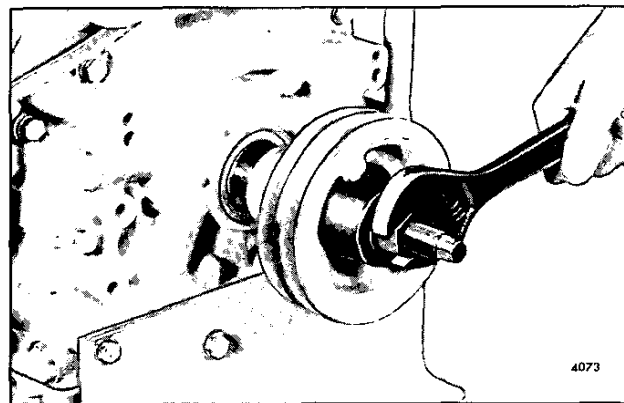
Installing Crankshaft Pulley Using Installer J 7773
